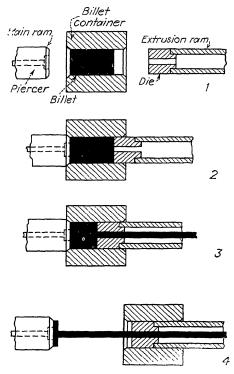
Indirect extrusion. (1) Billet is placed in container preparatory to extrusion. (2) Main ram moves to container, and extrusion ram moves up to billet. (3) Extrusion ram moves into billet, extruding metal through die. (4) Container, extrusion ram, and die are withdrawn. Saw cuts butt from extruded bar, and piercer pushes it off main ram.
